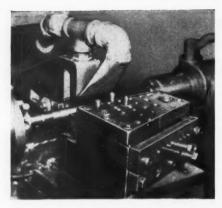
Use of cemented carbide tools on this job of turning pinions made of S.A.E. 1045 steel at the Farm Implements Division of International Harvester boosted production per tool arind some 300 per cent.
